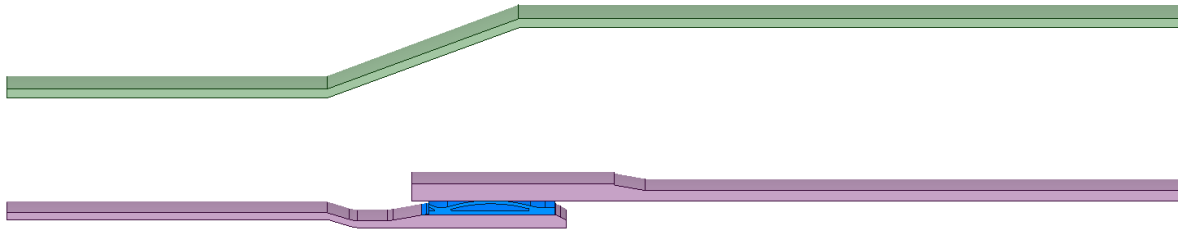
Assembly of hula seal domain extended by cylindrical surfaces
